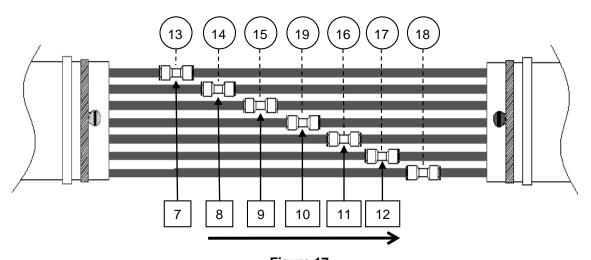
Install Outer Ring Tubes Couplings 8 through 12 to the Right of Tube Coupling 7; Tube 8 Opposite Tube 14, Tube 9 Opposite Tube 15, and So Forth
